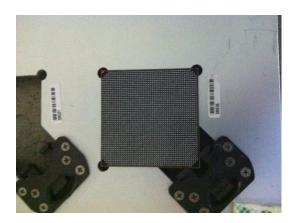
Close up view of Fixture for automated 3D X-Ray inspection
